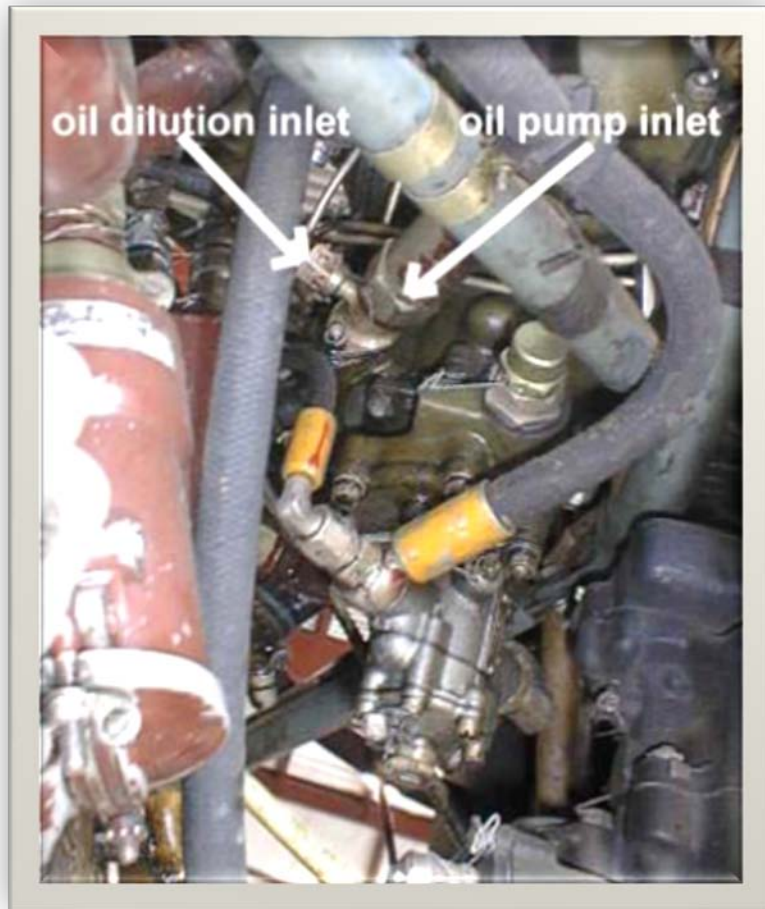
Oil Inlet (Oil Pump Inlet Fitting P/N 526200-60W)
